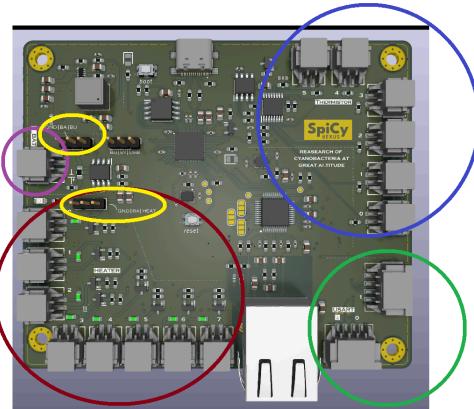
PCB with indicated connector types (comp. Table. 4-4).
